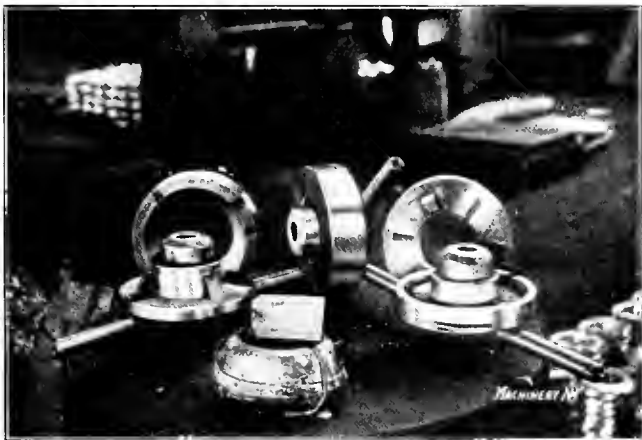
Metallic Packing for Piston-rods end Molds in which it is cast
